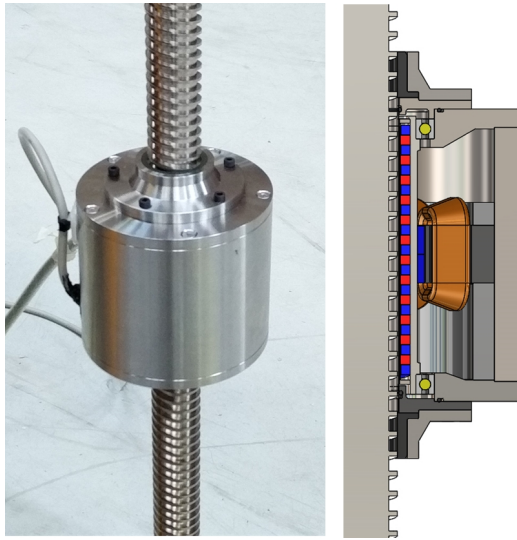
Final assembled MLS generator prototype and CAD cut through
